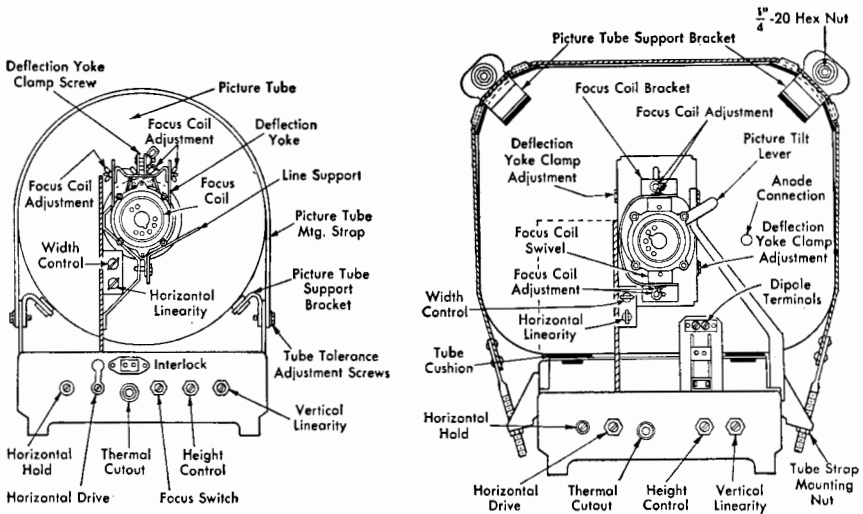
Two types of picture-tube mounting straps used to anchor tube to chassis
